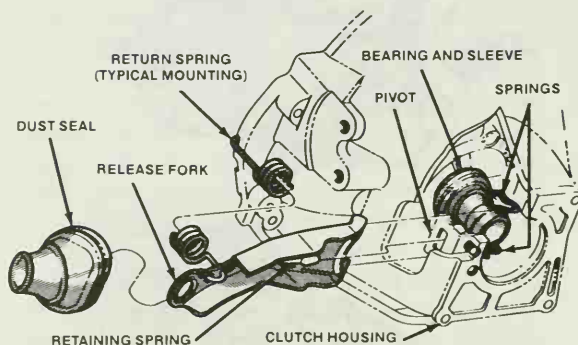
Release bearing and related parts. (Chrysler Corporation)
